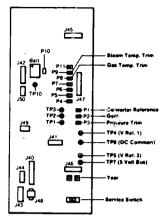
TEST POINT AND POTENTIOMETER LOCATIONS: Main Printeen PC Board.
